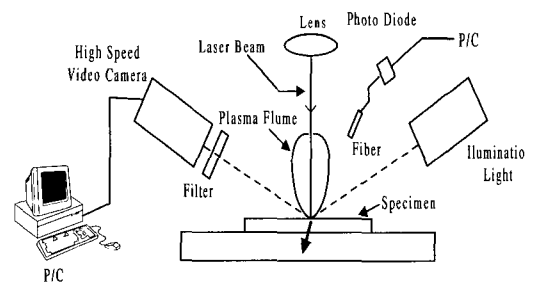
The schematic diagram of CO₂ laser welding experiment
